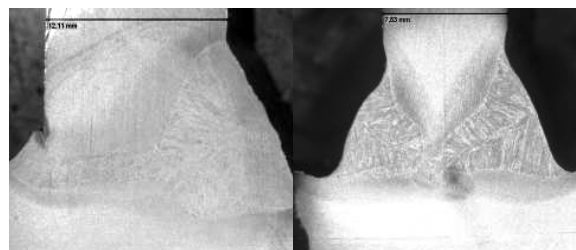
left: Laser hybrid welded T-joint; 8 kW laser power, welding depth 12mm, welding speed 1,3 m/min right: double sided simultaneous welding of an 8 mm thick sheet (enabled due to energy sharing option of the disk laser)
